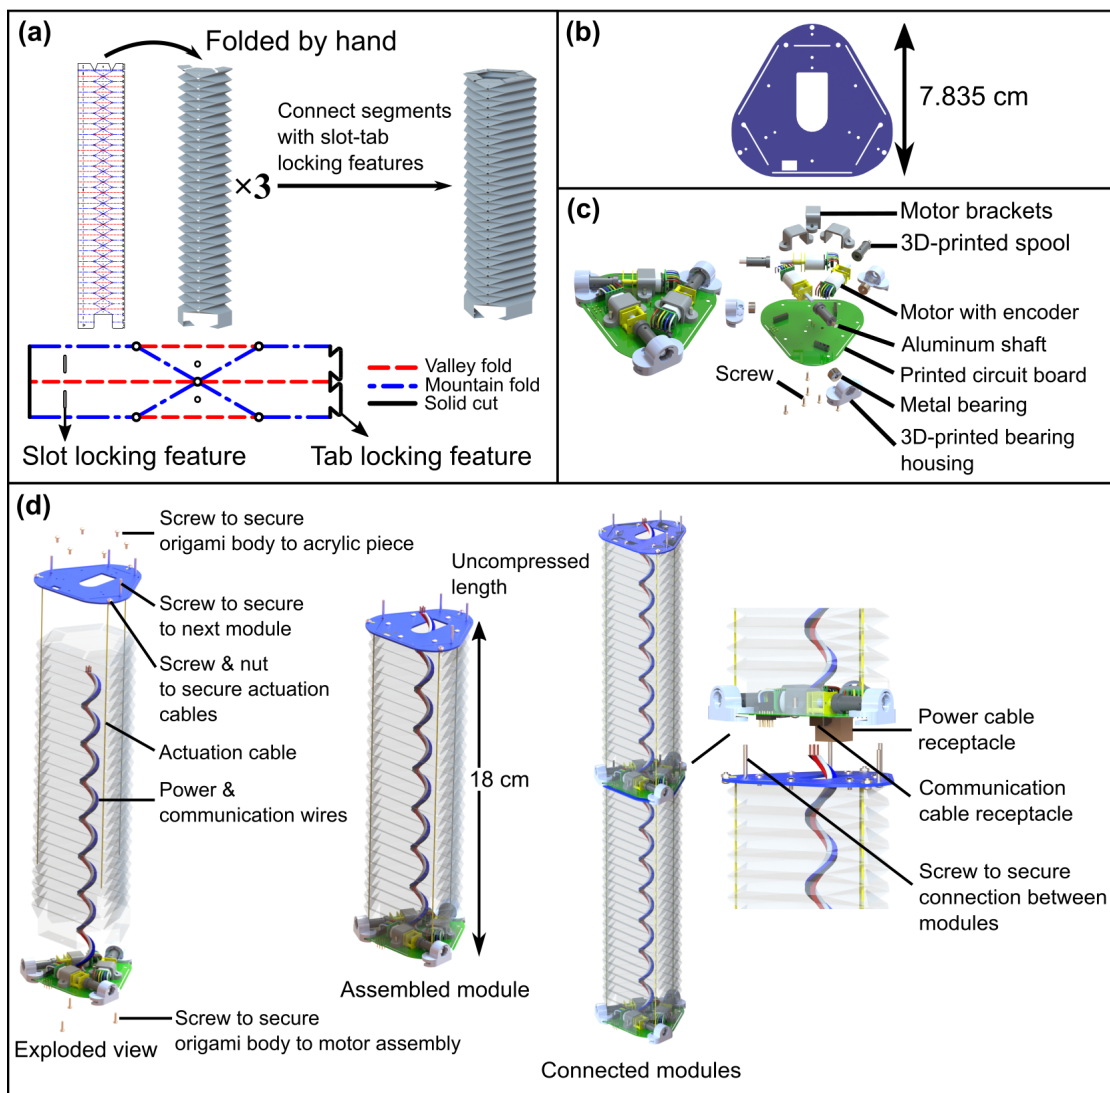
(a) Origami body assembly, (b) acrylic top plate, (c) motor assembly, (d) origami module assembly.
